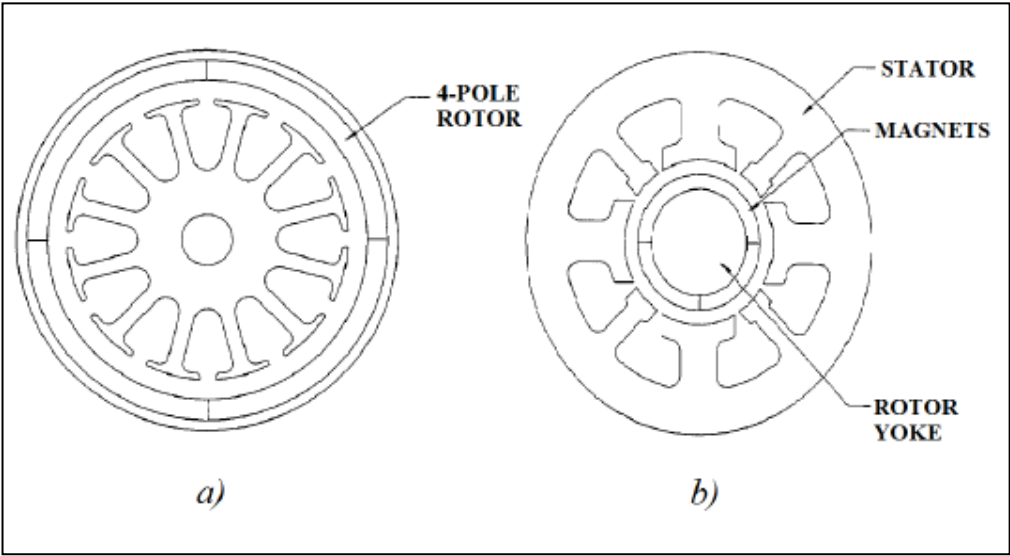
The two BLDC motor configurations: a) Outer-rotor BLDC motor, b) inner rotor BLDC motor ^[3]
